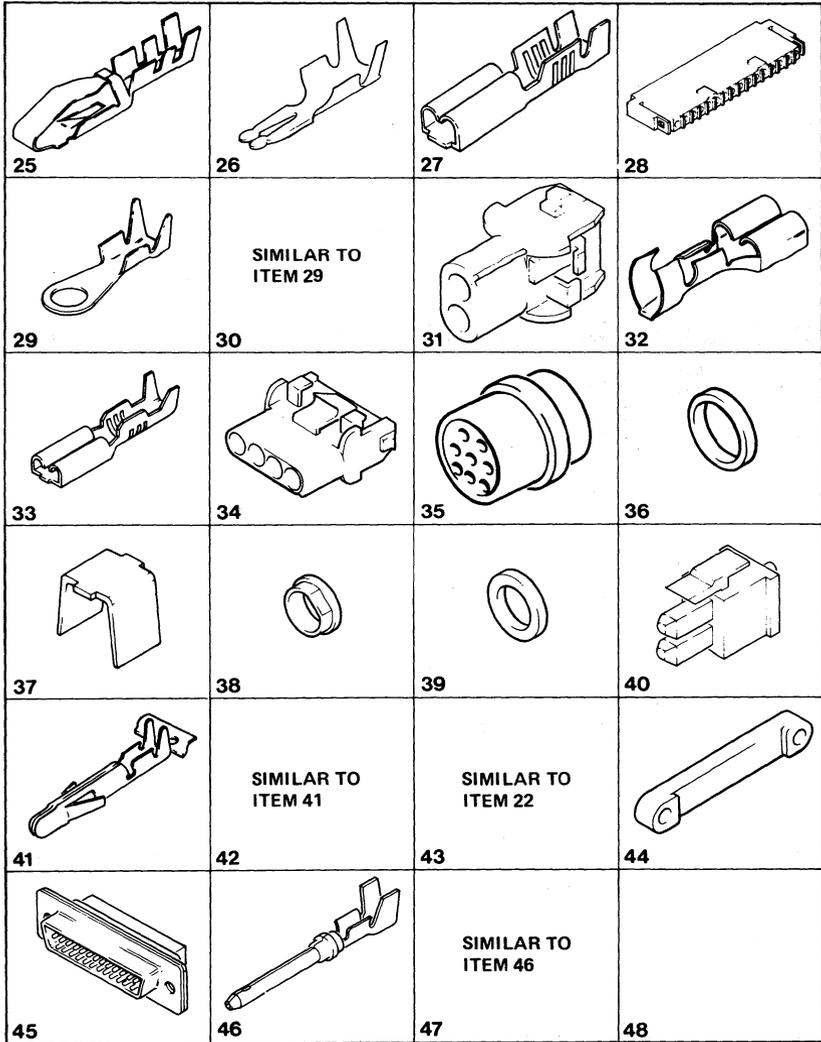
(Sheet 2 of 2). Jumper and Cable Component Assembly
